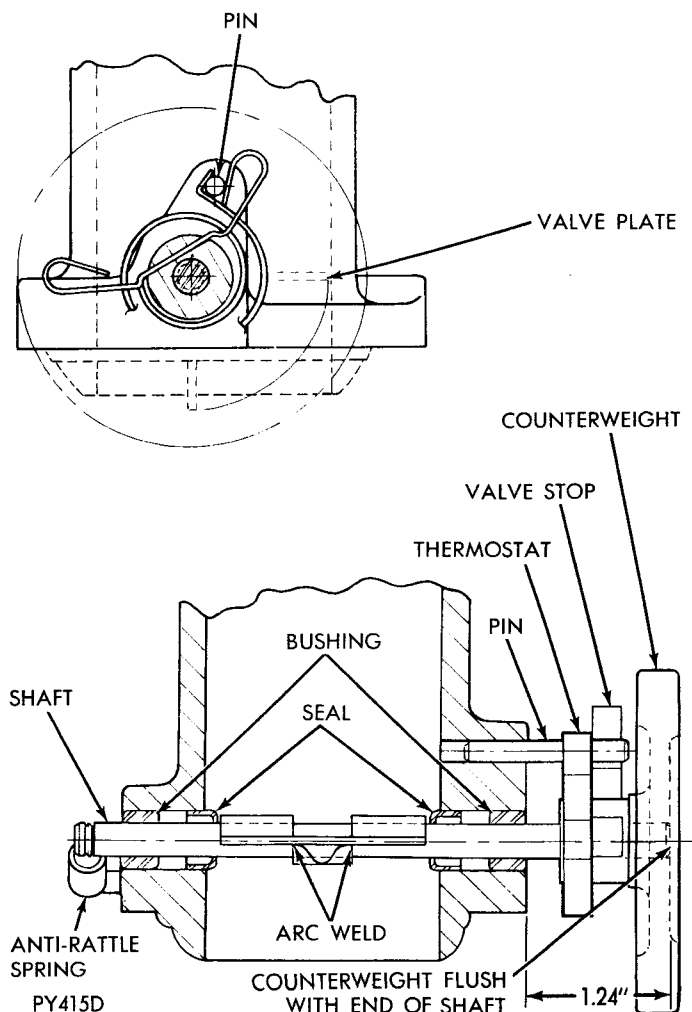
Proper Manifold Heat Control Valve Installation (400 and 440 Cubic Inch Engines)
